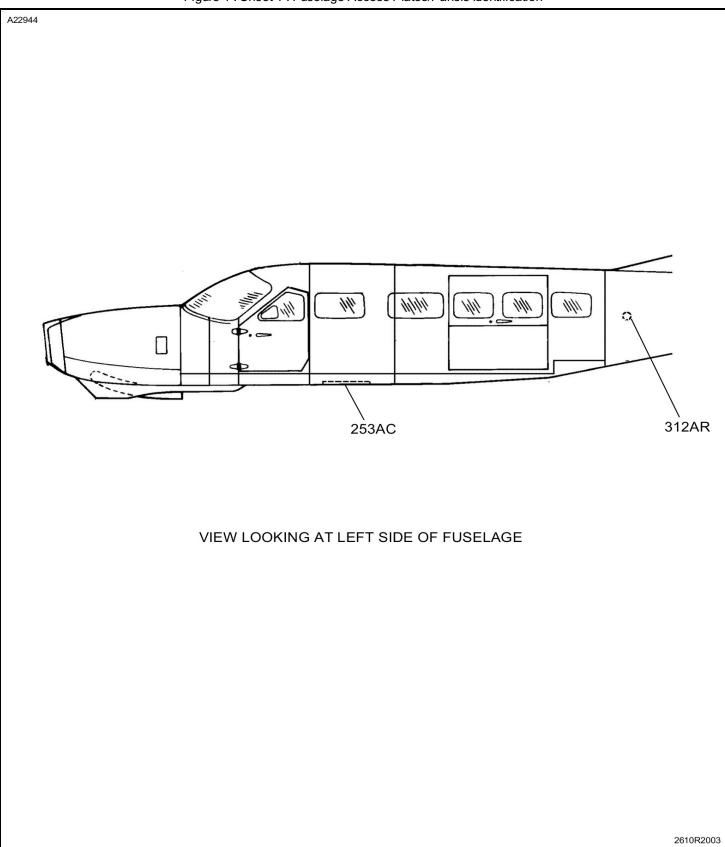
Sheet 1 : Fuselage Access Plates/Panels Identification
